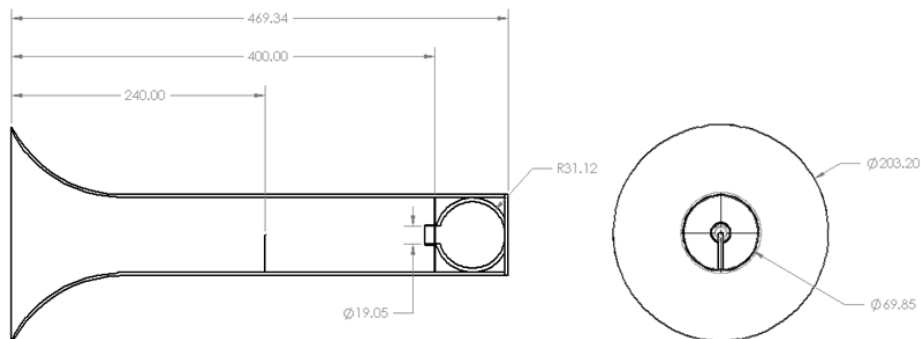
Dimensioned Drawing of Acoustic Energy Harvester (Shown Dimensions are in Millimeters)
